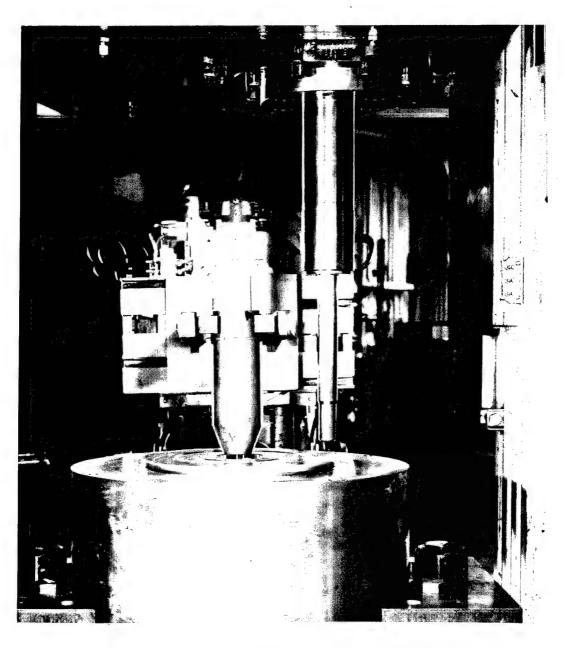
LOADING OF EXTRUSION BILLET ASSEMBLY INTO HYDRAFILM EXTRUSION CONTAINER
